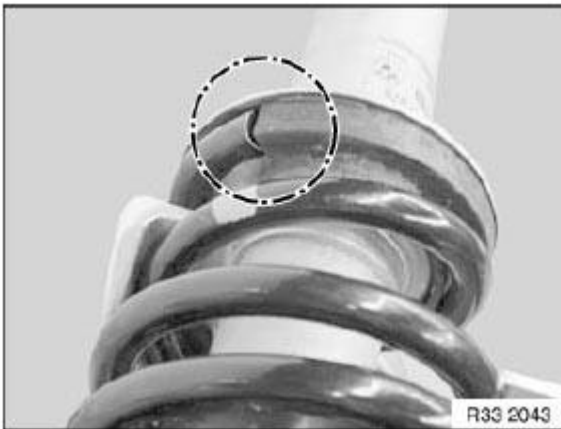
Ensure Coil Spring Is Correctly Seated In Spring Pad
